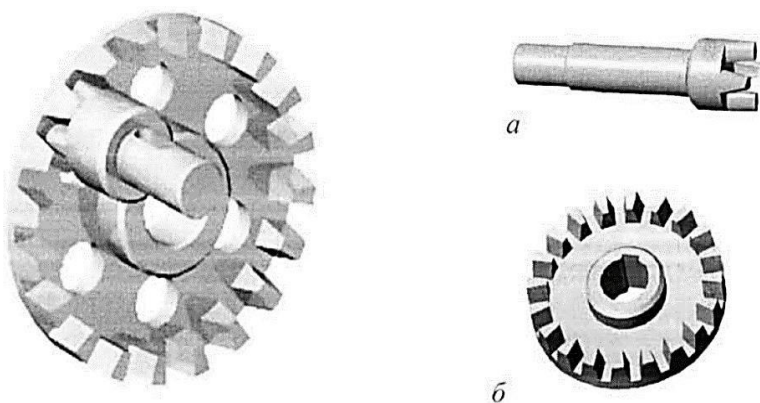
Gear transmission with internal gearing of the end teeth and parallel axes of rotation of the wheels
